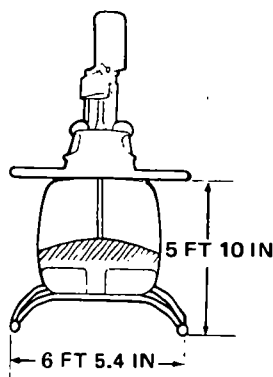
Principal Dimensions, OH-58A (Kiowa)
